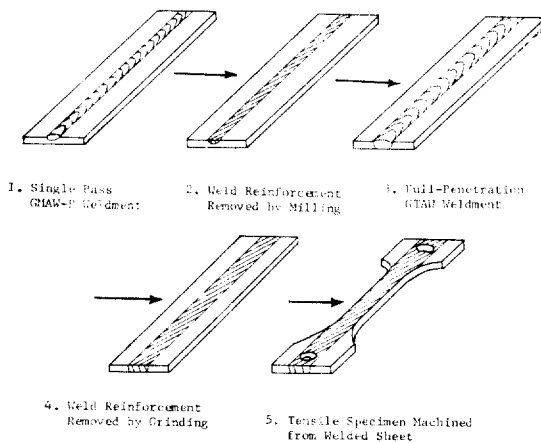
Schematic illustration of the dual welding process employed in the production of the duplex weld metals.
